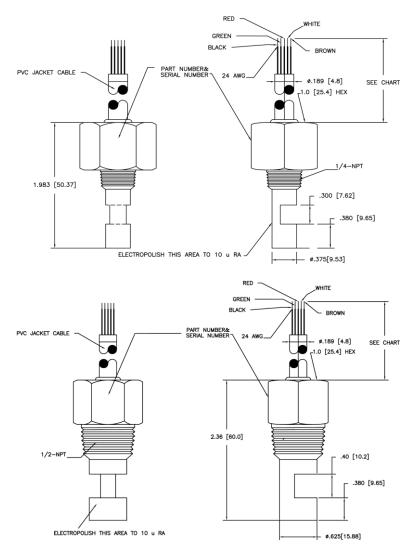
Top - LL-01 series element with 1/4" NPT sensor mounting Bottom - LL-01 series element with 1/2" NPT sensor mounting
